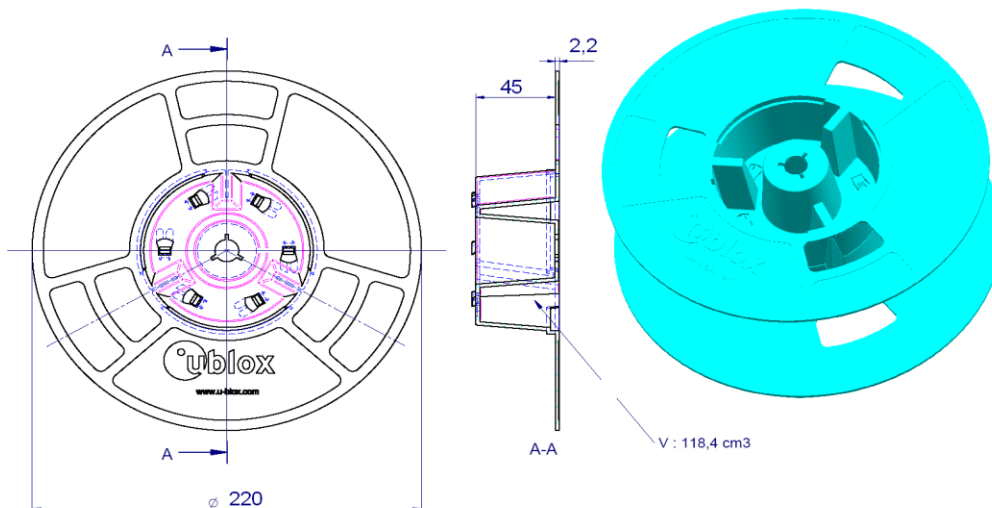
Dimension of reel for 250 pieces (dimensions unless otherwise specified in mm)
